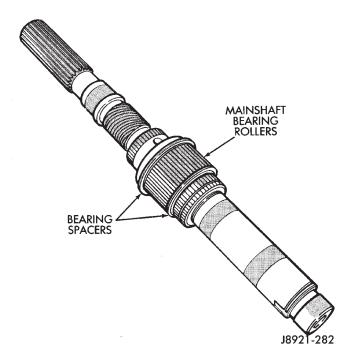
Installing Mainshaft Bearing Rollers and Spacers
